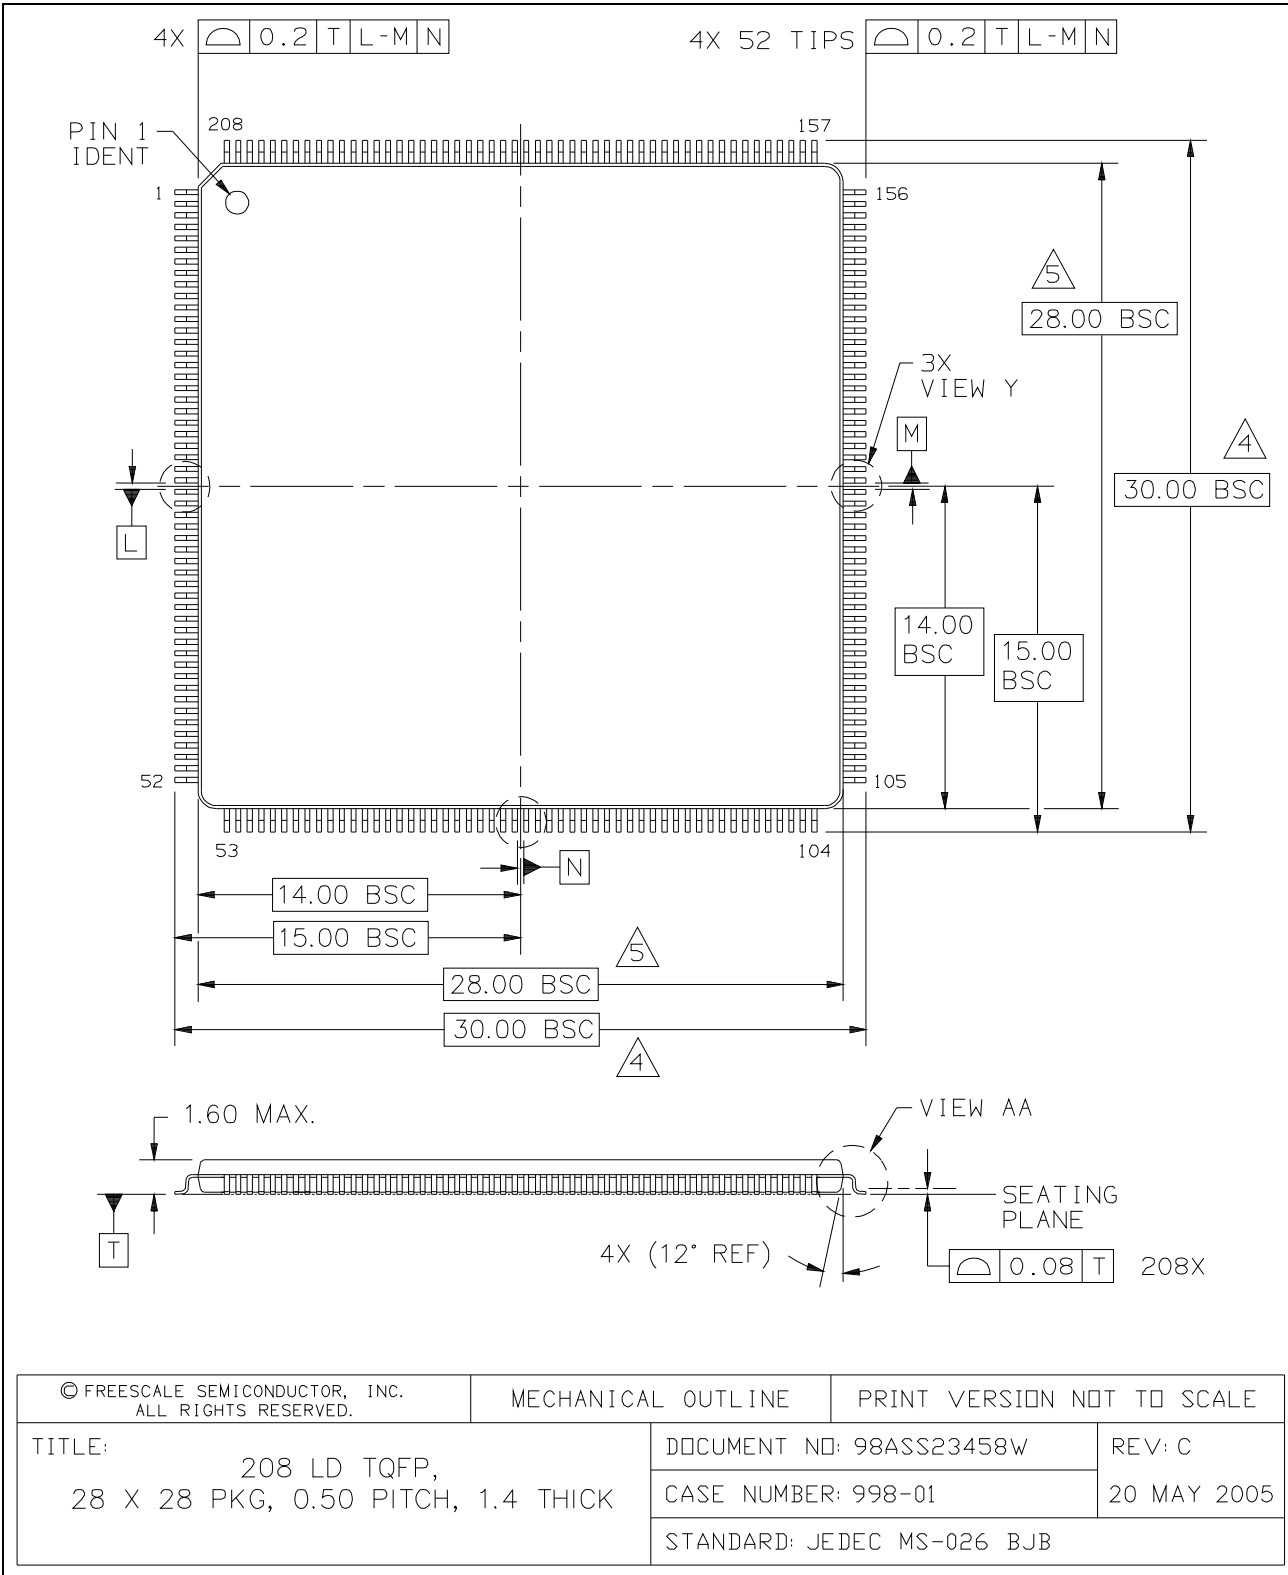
208 LQFP mechanical drawing (Part 1 of 3)
